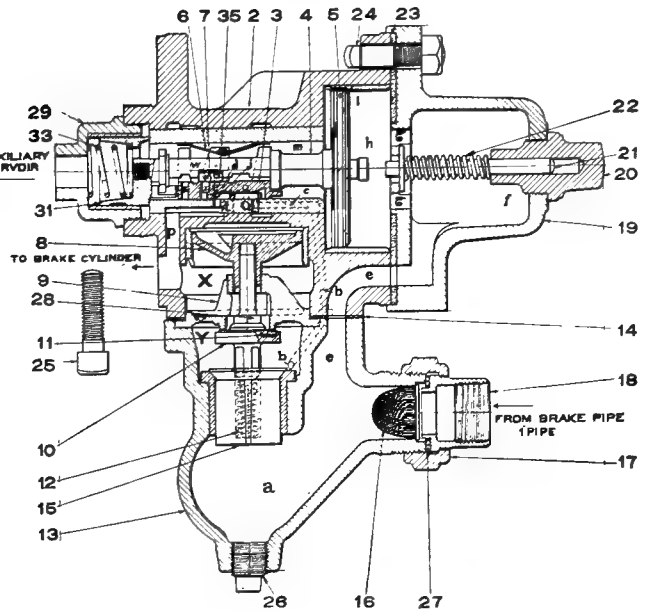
Standard Quick Action, Quick Service, Uniform Release, Uniform Recharge Freight Triple Valve, Type K-1.
